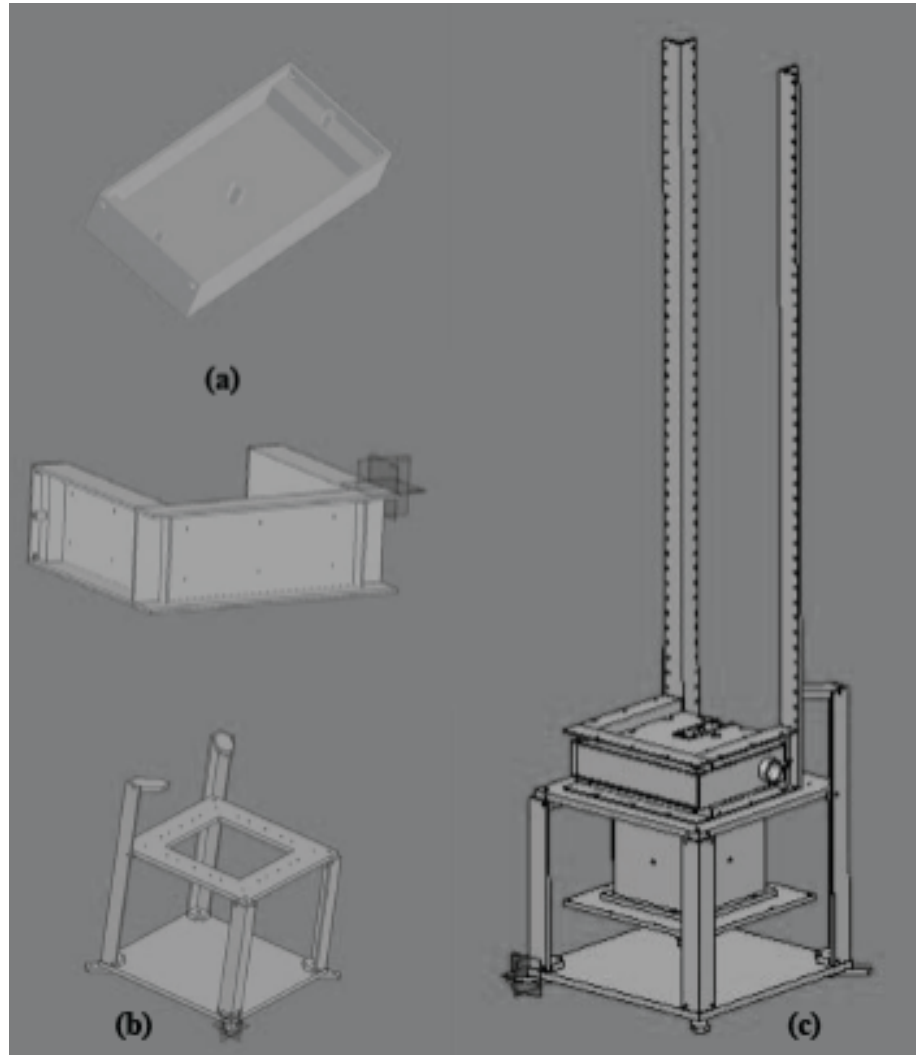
Components of the Combustion Furnace Consisting of (a) Modular Sections; (b) Mounting Base; and (c) Base with Structural Mounting Angles for Modules (He, 2008)
